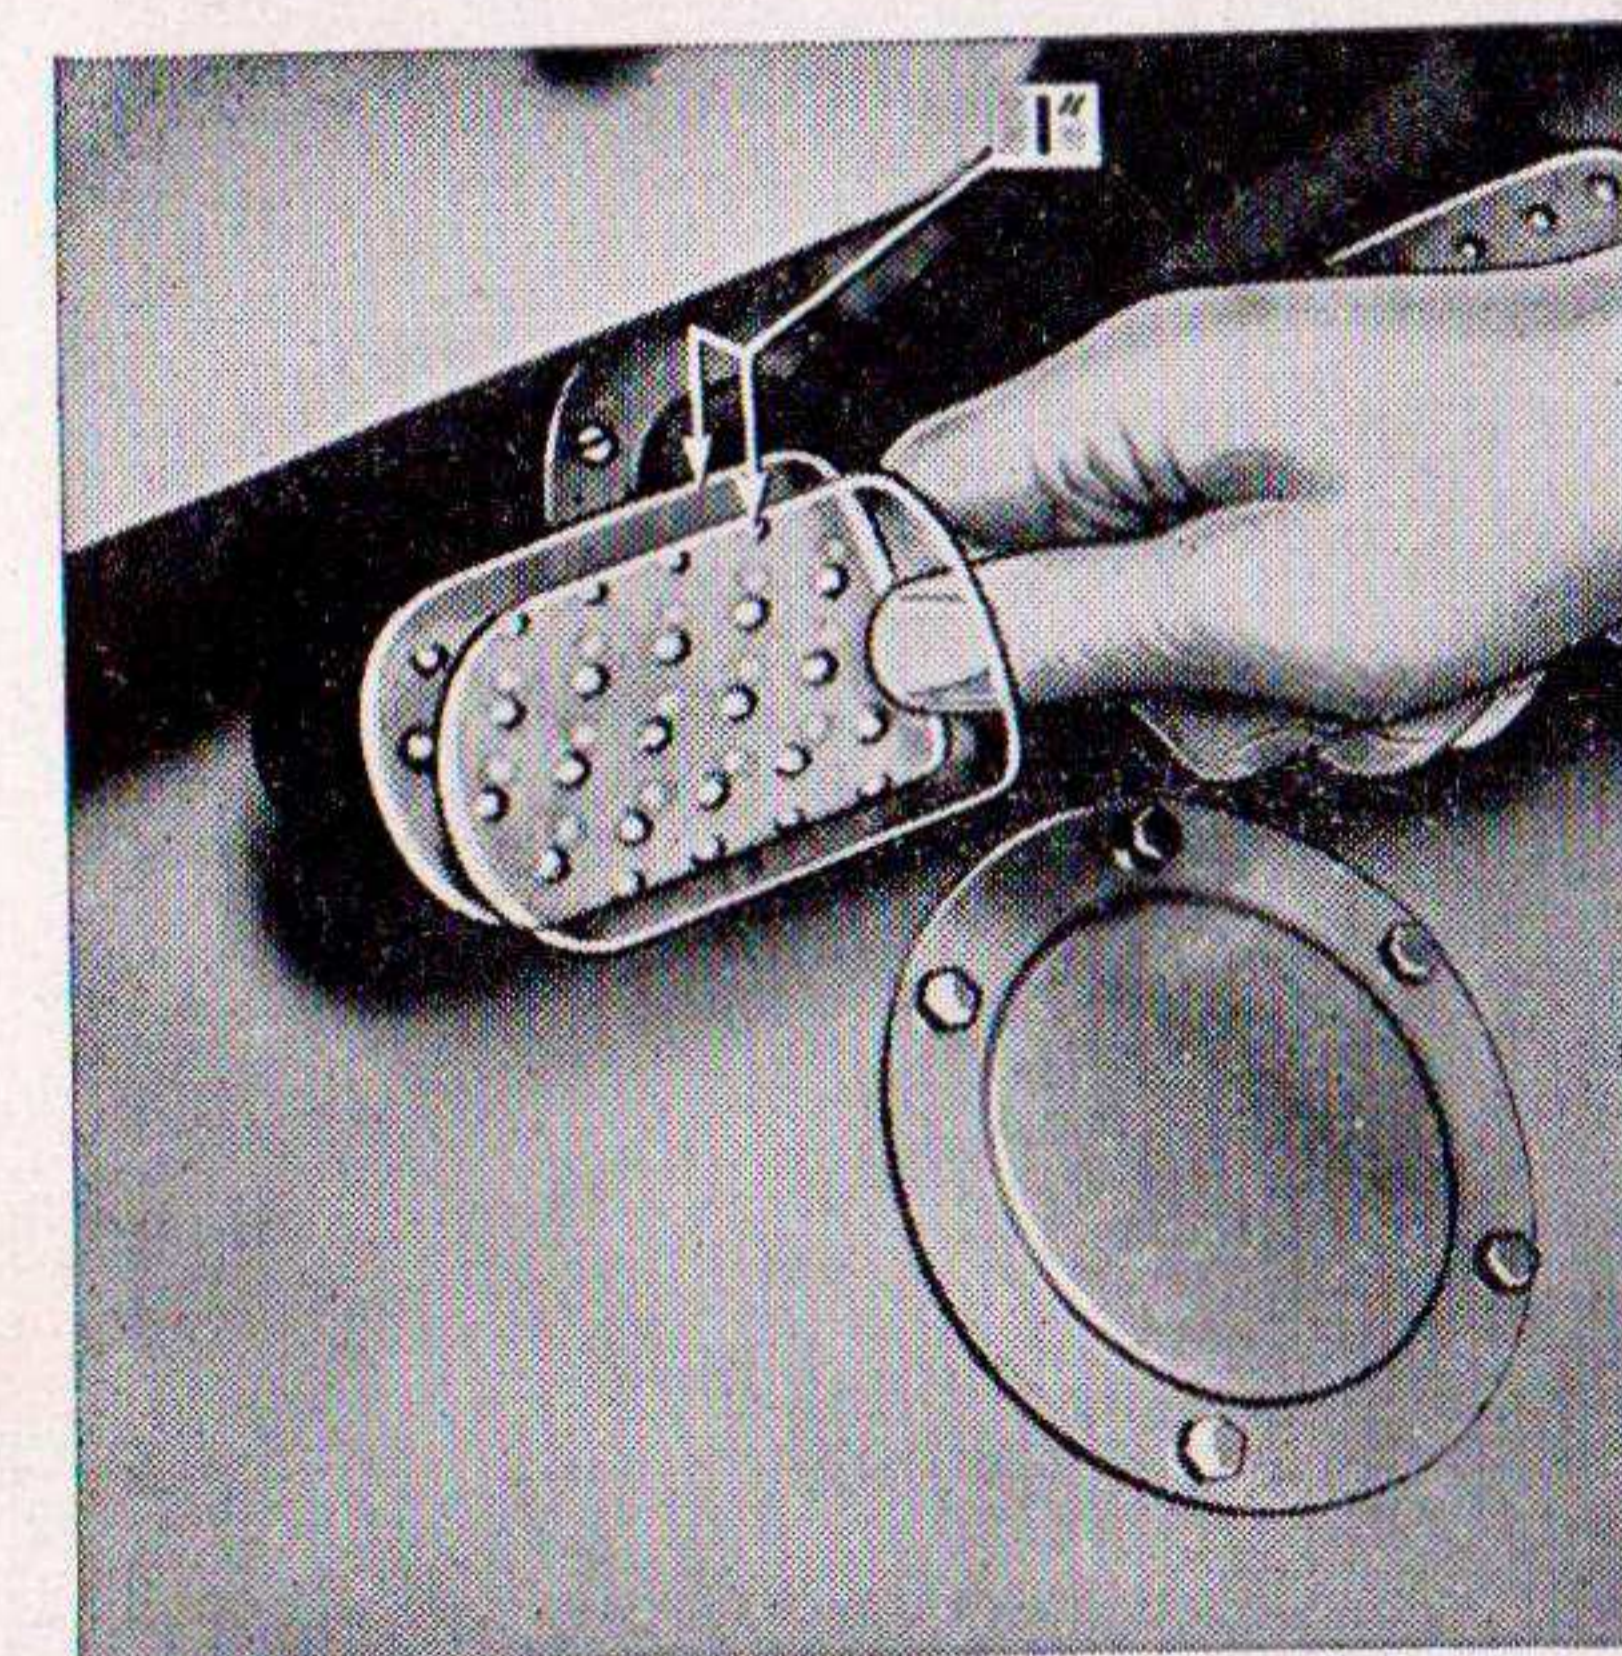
CLUTCH PEDAL ADJUSTMENT
